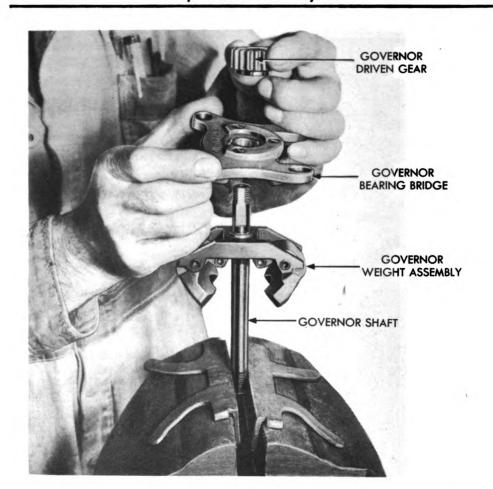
Separating Bearing Bridge, Weight Assembly, and Driven Gear From Shaft
